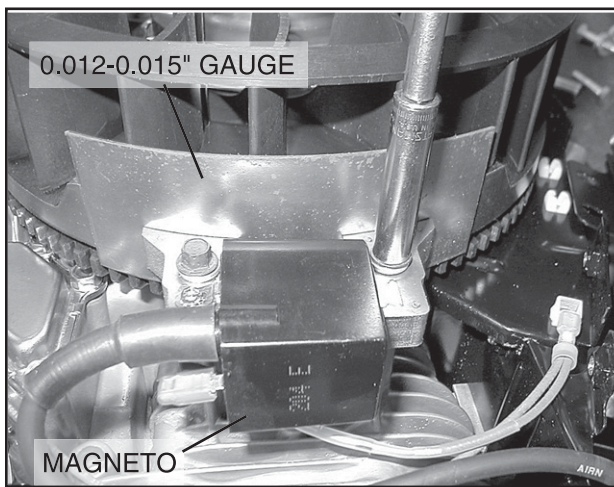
Setting Ignition Magneto (Armature) Air Gap
